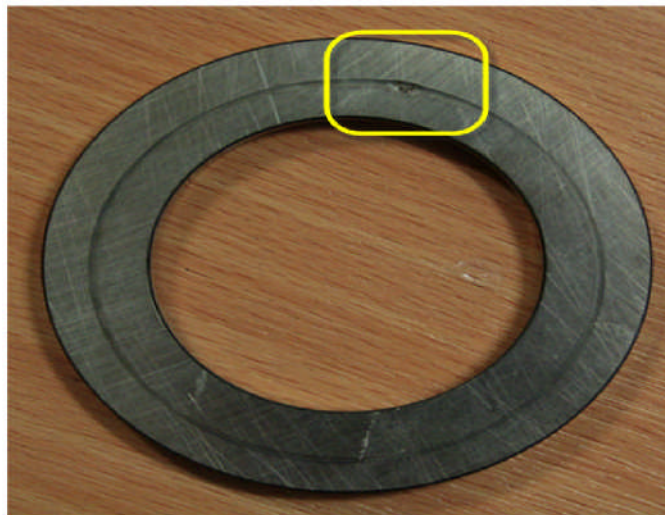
Surface damage on flat bearing race, see 'box' section
